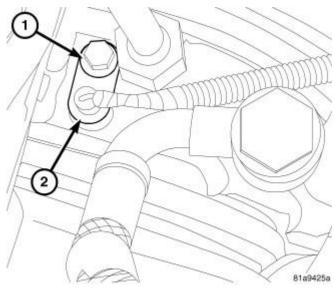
Turbocharger Speed Sensor & Bolt Courtesy of CHRYSLER GROUP, LLC
